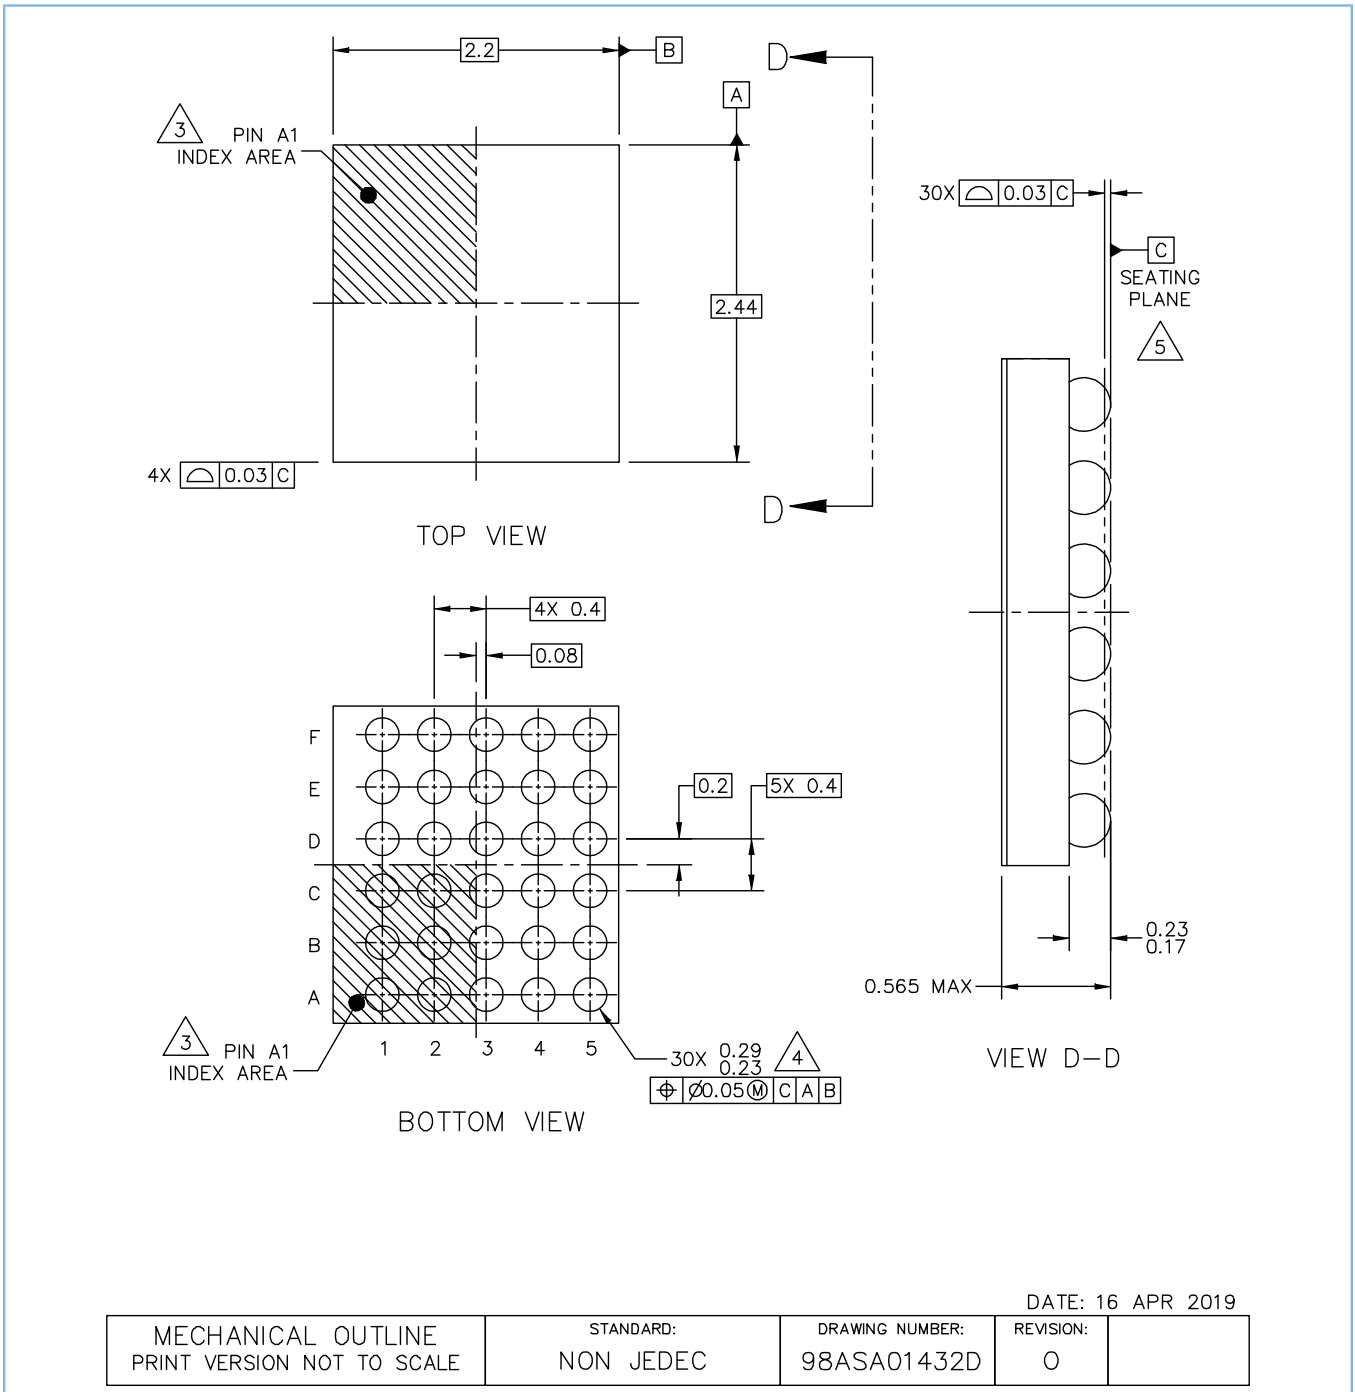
Package outline WLCSP30 (SOT1443-7); without back side coating
